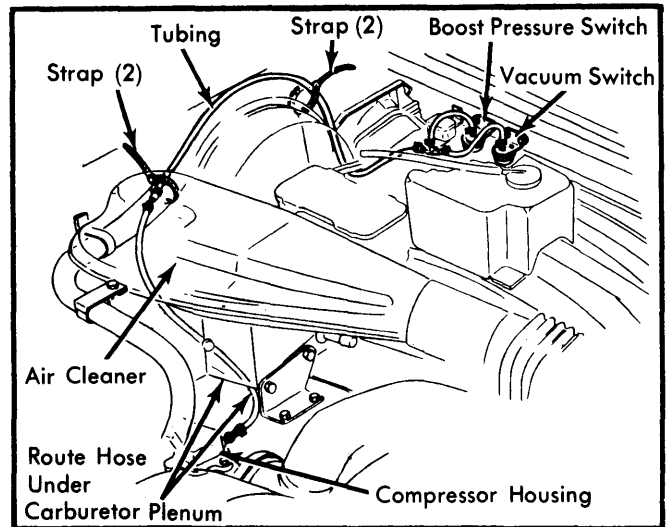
Boost Gauge Switch Location On Buick Century & Regal Models
